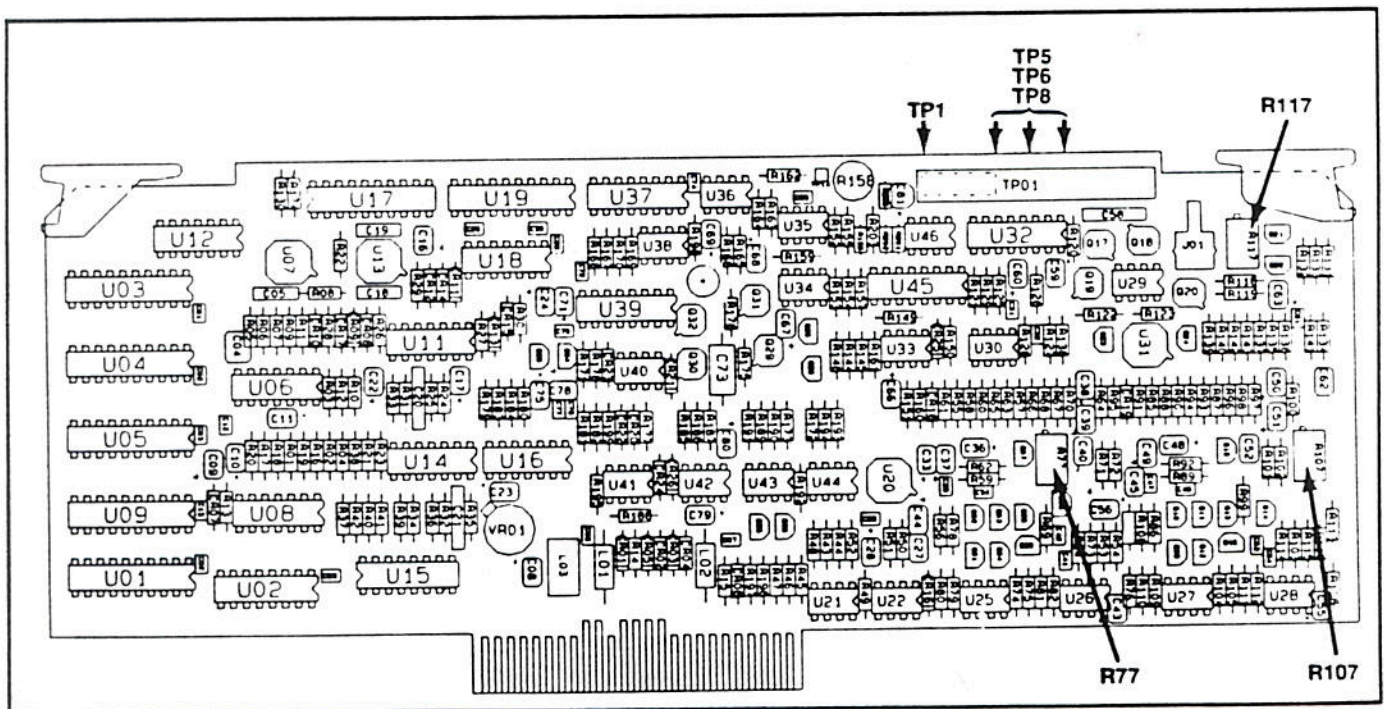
A15 ALC PCB Test Point and Adjustment Locations
